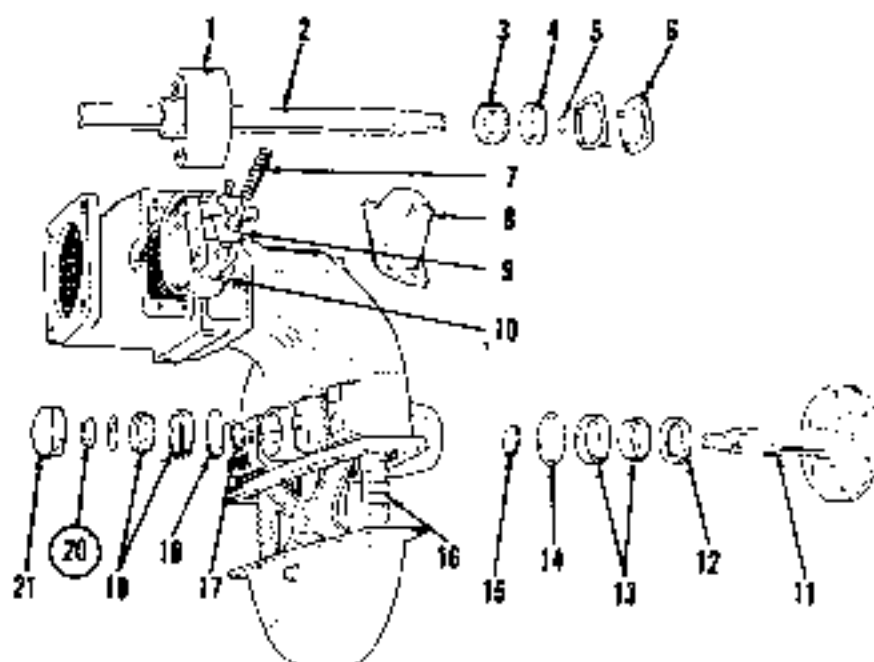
Pony final drive assembly. Wheel axle shaft bearings are adjusted by nut (20). Brake drum (1) is keyed to final drive shaft (2).
